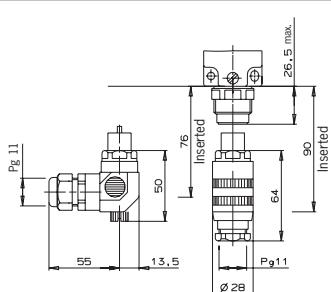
Dimension drawing for NZ2VZ-5... with plug connector SR6
